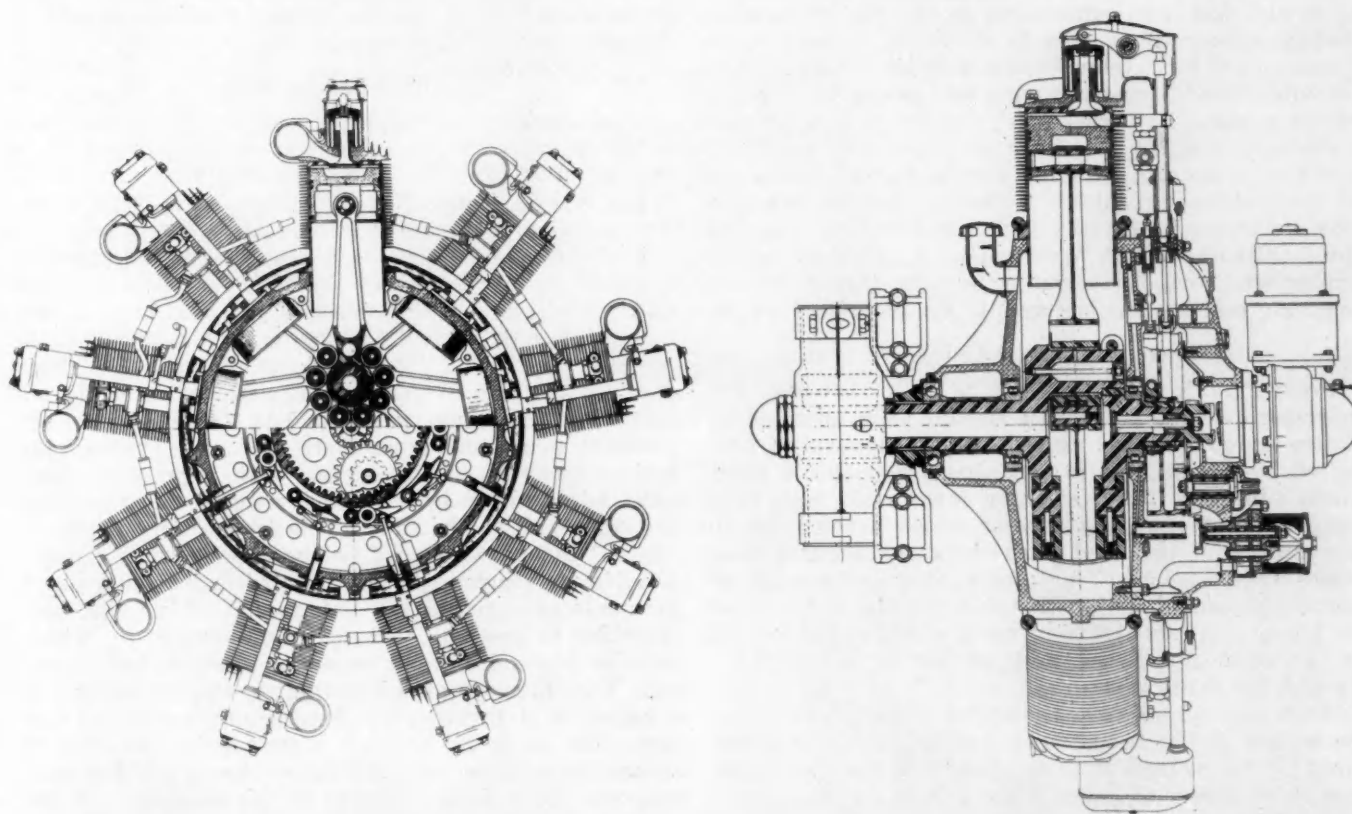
ELEVATION PARTLY IN SECTION AND VERTICAL LONGITUDINAL CROSS-SECTION
